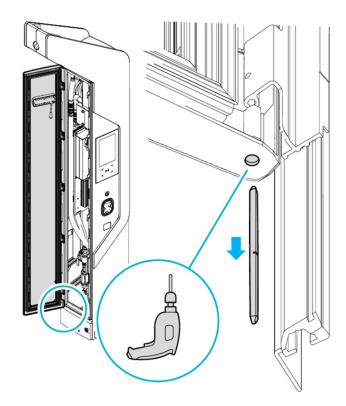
Door version 1, 2: Removing the lower hinge bolt
